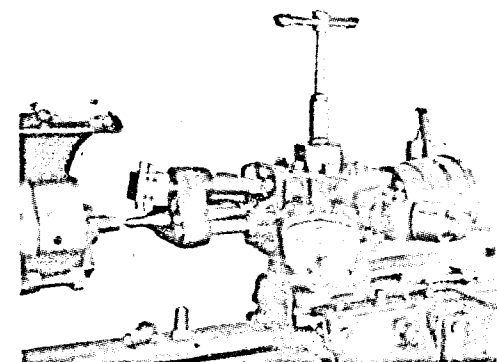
View of some of the special toolholders for producing Fusible Plugs.
